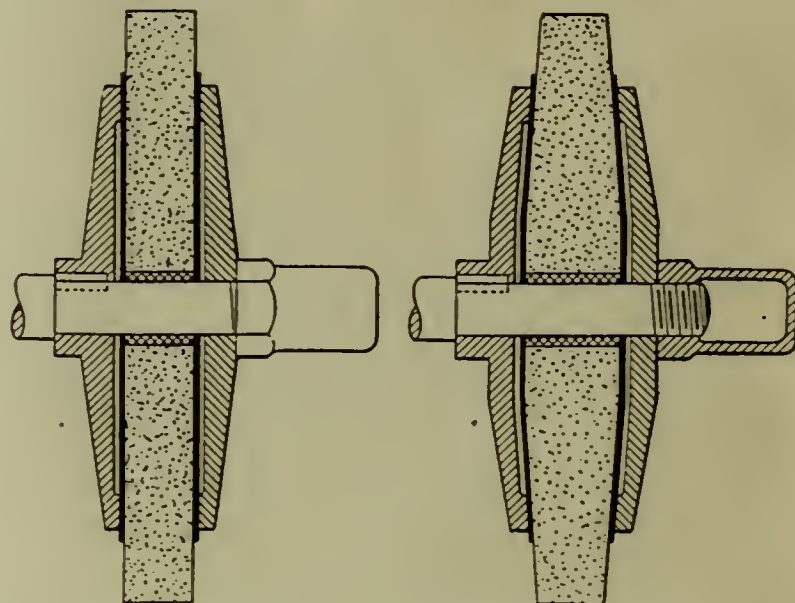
Proper Forms of Flanges and an Improved Safety Nut.
